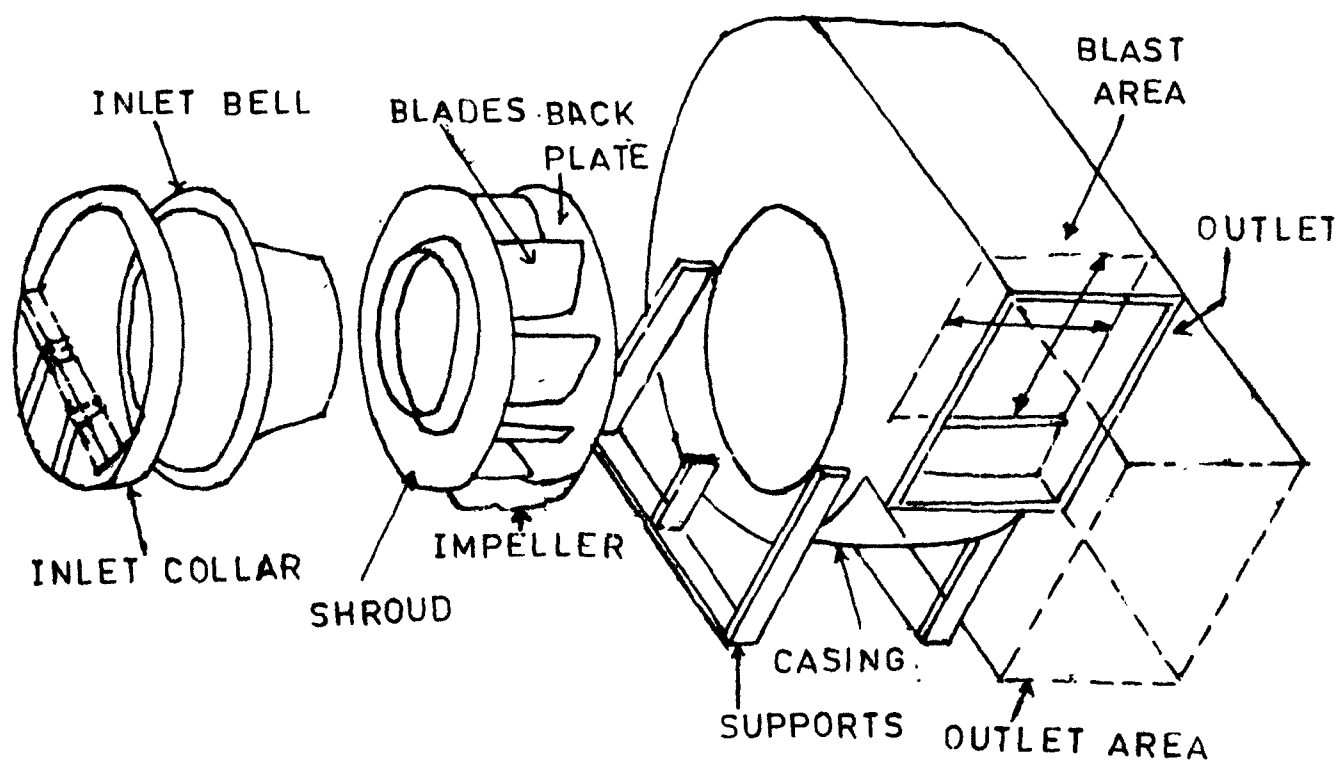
PARTS OF CENTRIFUGAL BLOWER
